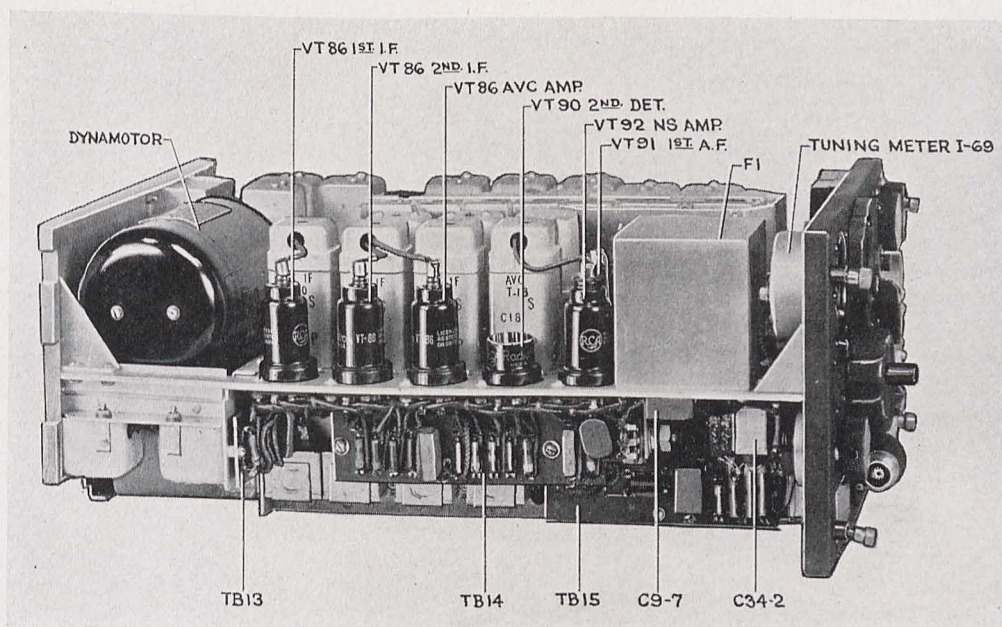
Radio Compass Unit BC-310-A, Chassis, Left Side View
